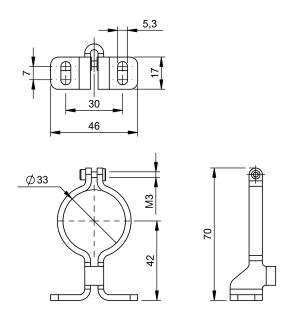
Rotating mounting bracket BAM MC-LG-036-T01
